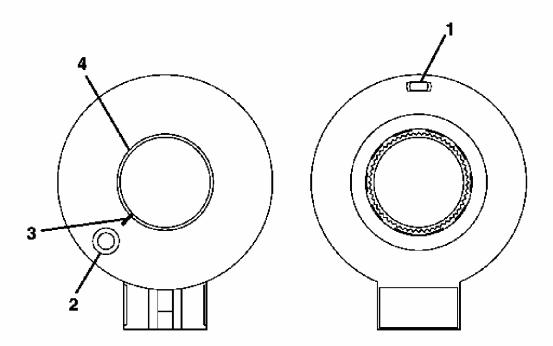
Identifying Steering Wheel Position Sensor Center Pin, Rotor Flange Cuff & Installation Alignment Mark Courtesy of GENERAL MOTORS CORP.
